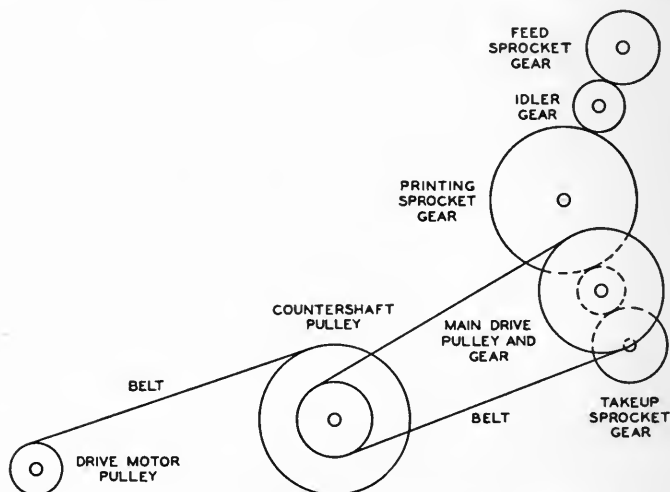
Mechanical drive system; Bell & Howell Model *D* printer.
